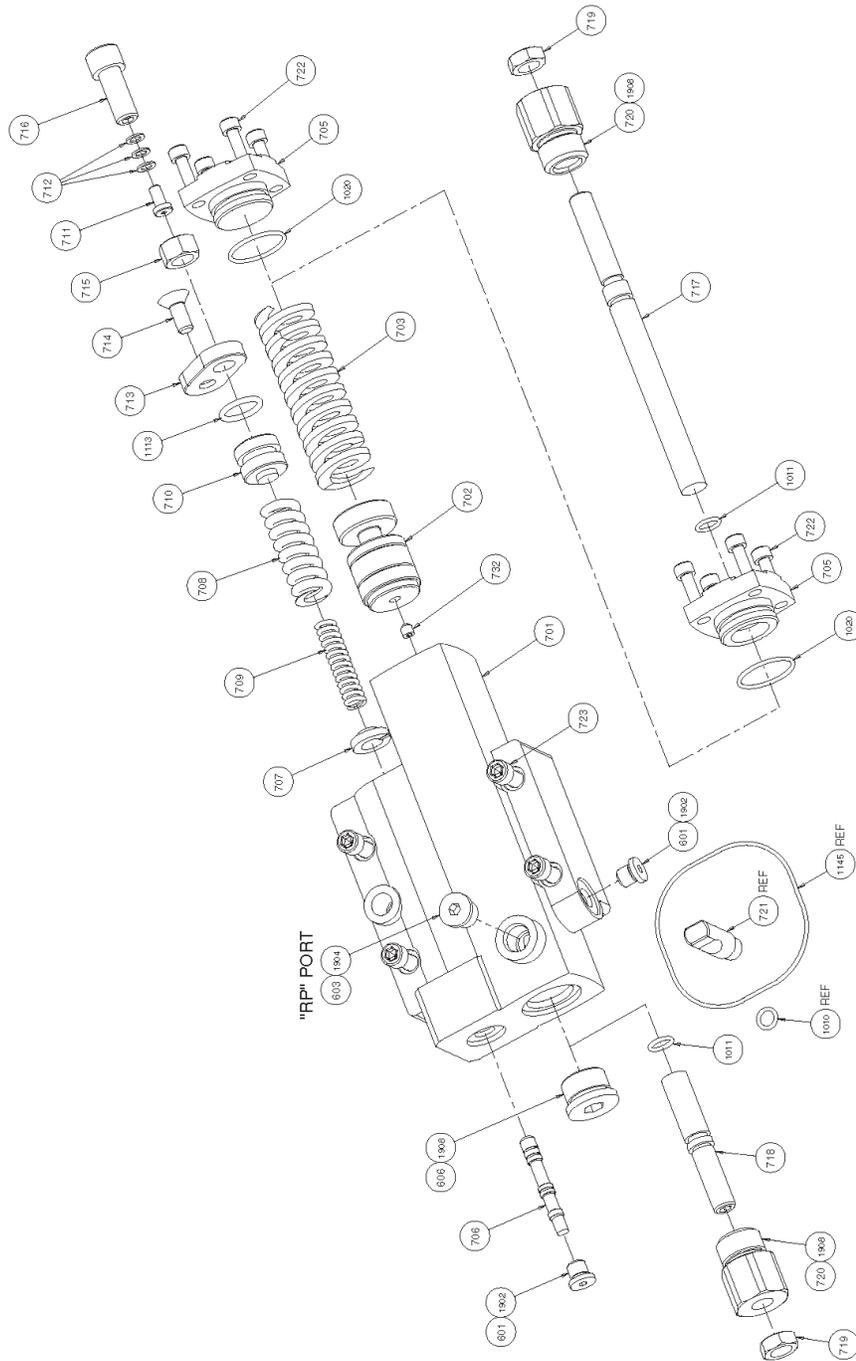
Parts Drawing for "P-1NN" and "P-LNN" Control (519975-101 sheet 1)
